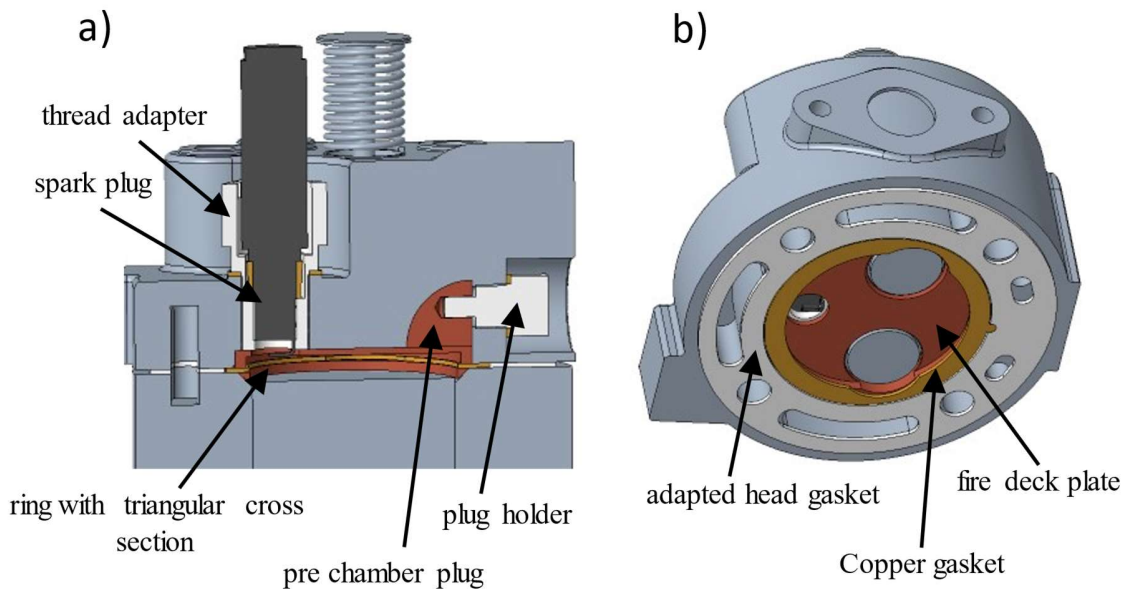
CAD model of the modified cylinder head. Metal inserts in auburn color. a) cross section, b) bottom view.
